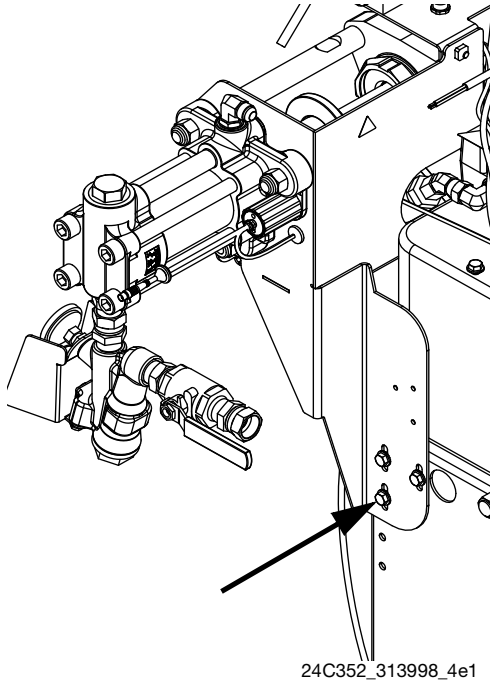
Lube Cylinder, Viewed from Rear Left of Machine
